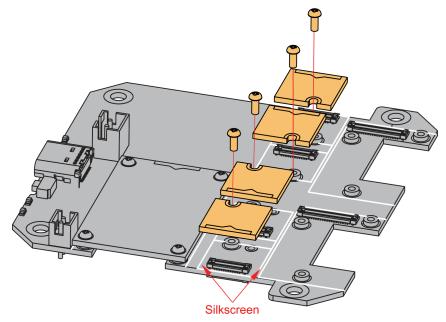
WisBlock Sensor silkscreen on the RAK19001 Base Board
